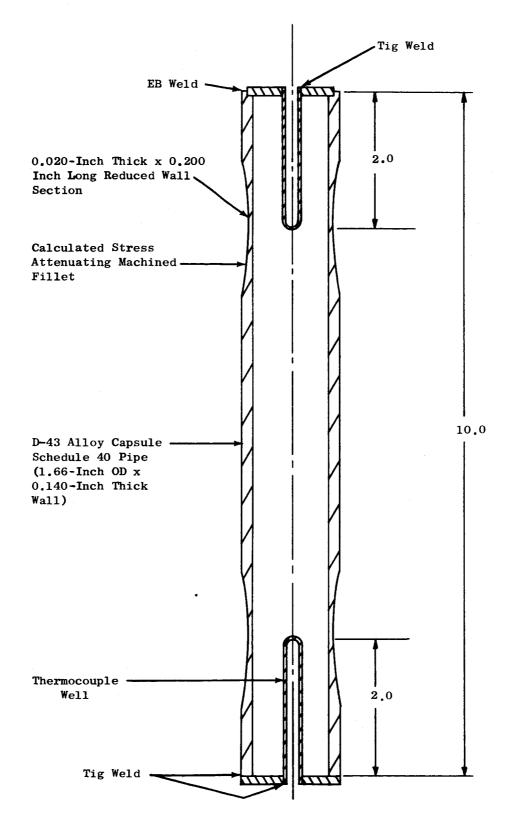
D-43 Alloy Refluxing Potassium Corrosion Capsule with Reduced Wall Sections for Measuring Induced Strain.
